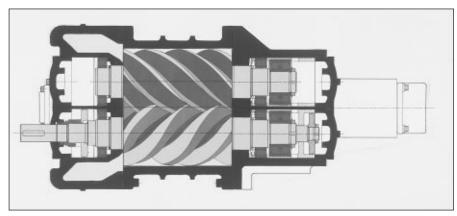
Cutaway diagram of a twin-rotor screw compressor Courtesy of Howden Compressors Ltd
